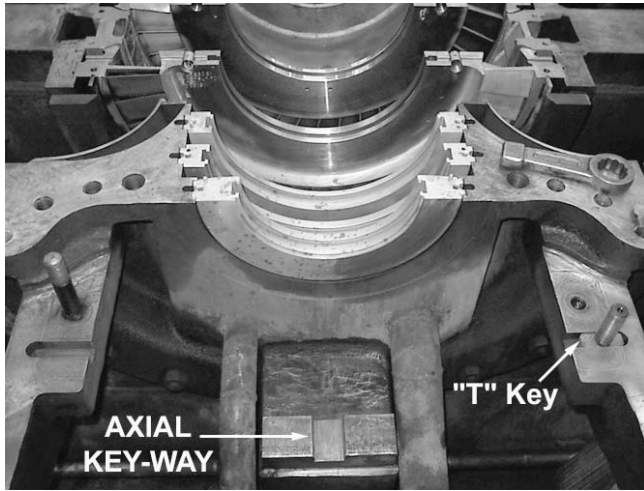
Exhaust End Bearing Case Bracket after Cleaning.
